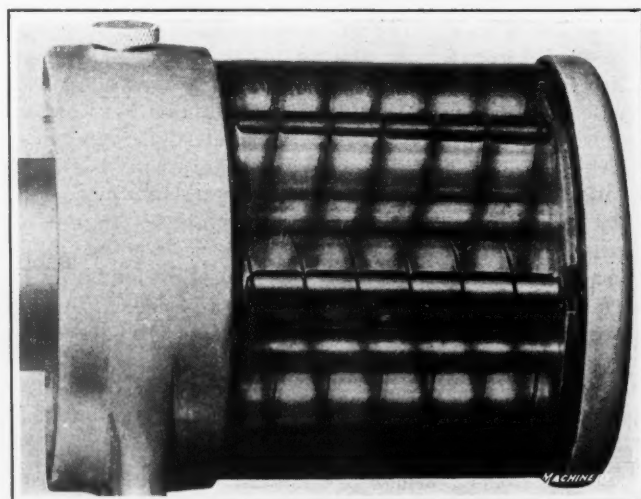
Special Machine demonstrating Uniform Distribution of Lubricant by Spiral Grooves in Hyatt Roller Bearings
